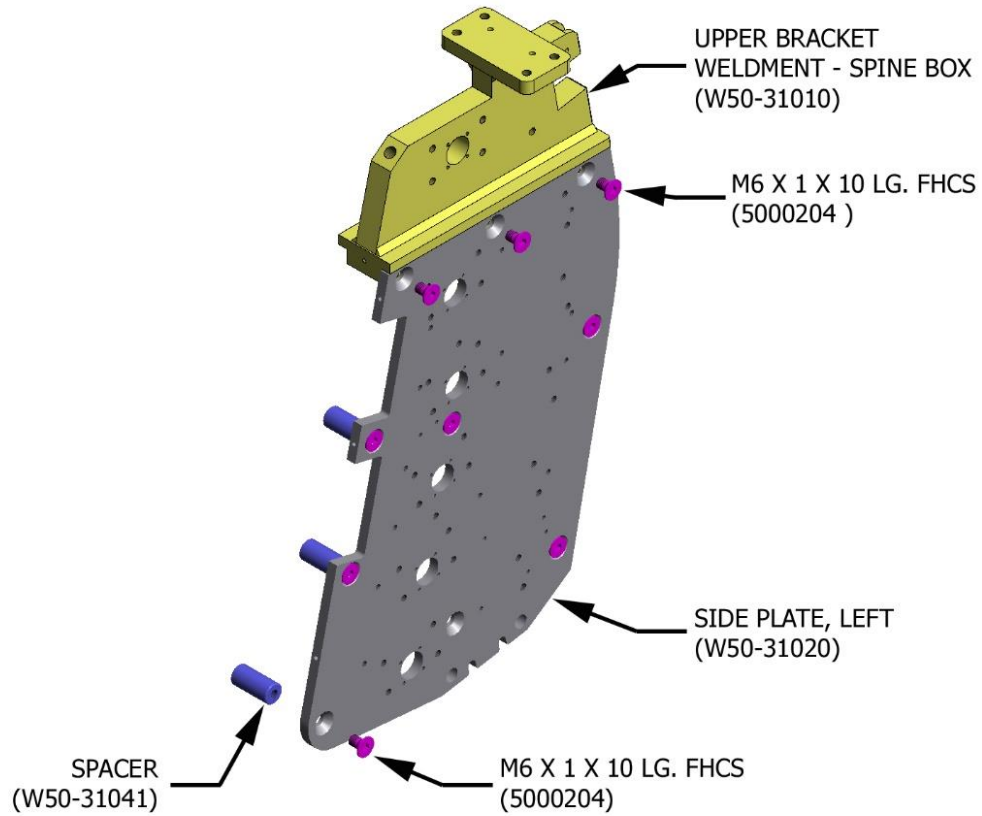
Attaching the spaces and the spine box upper bracket weldment.
